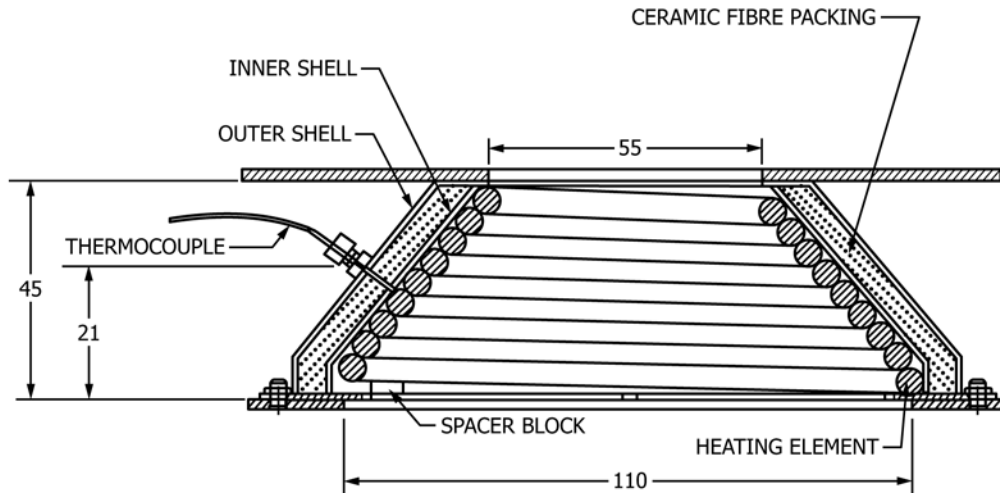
Cross-Section View of Smoke Chamber Cone Heater (dimensions in mm) (Test Method E1995)
